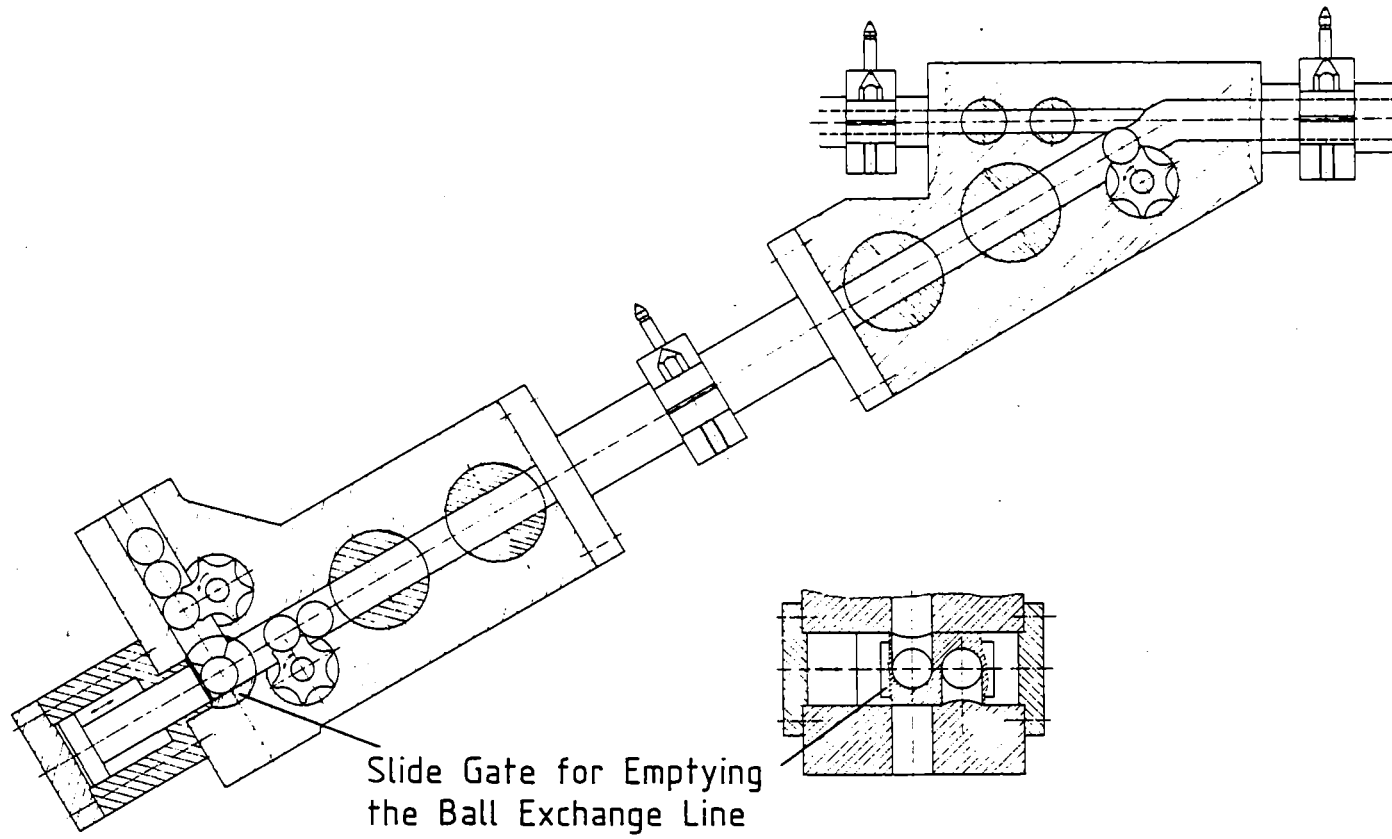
Cross Section of a Valve Block and a Refilling Machine
